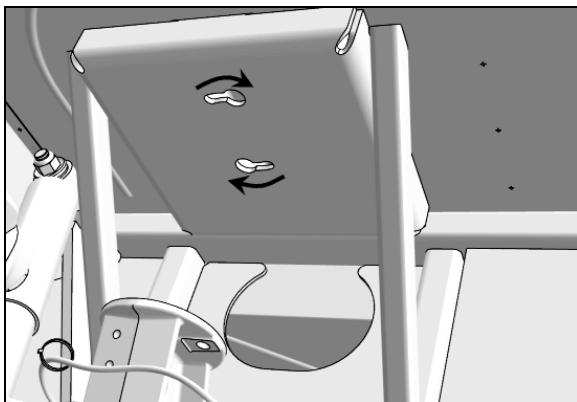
AIR SPRING UPPER MOUNTING PLATE
